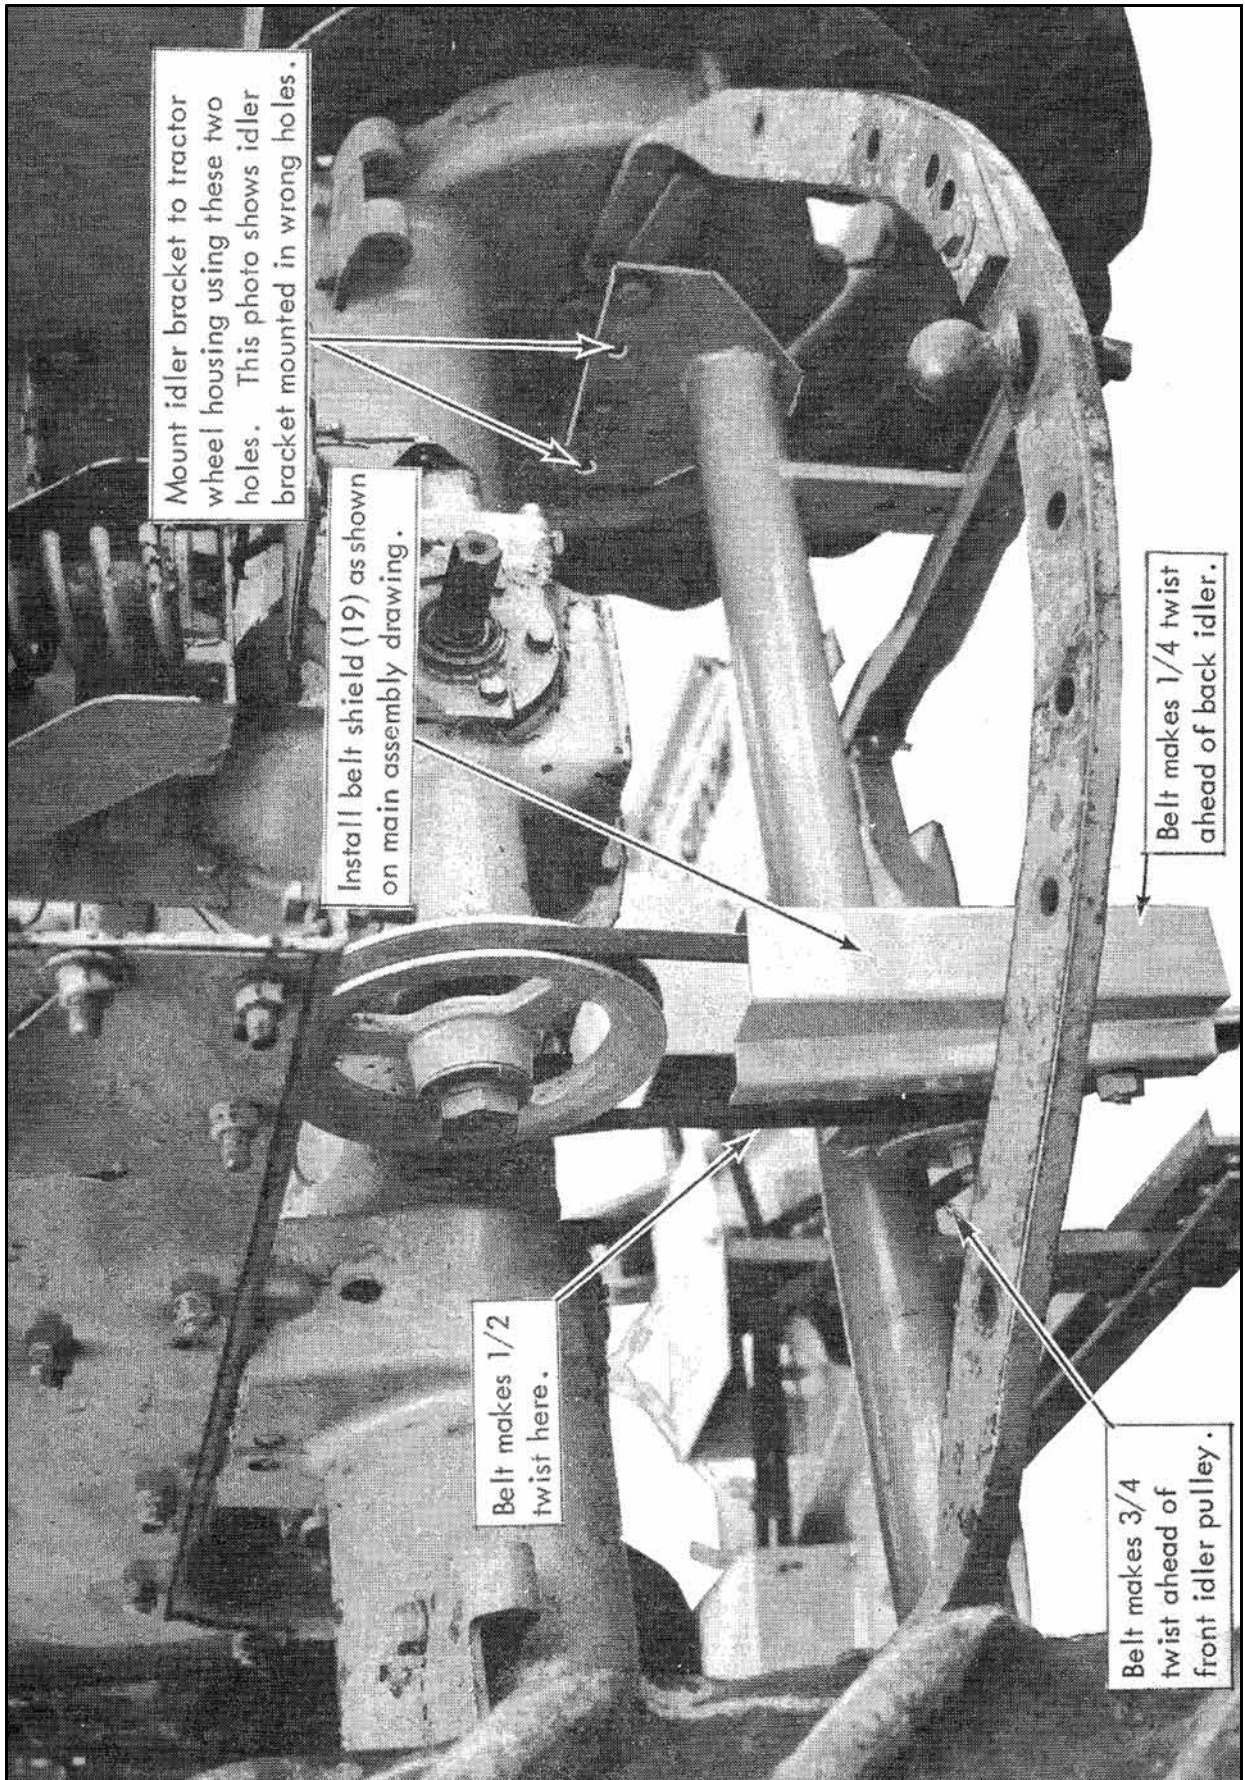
L59-AC/C & L306-AC/C Mounting Frame Assembly Photo
